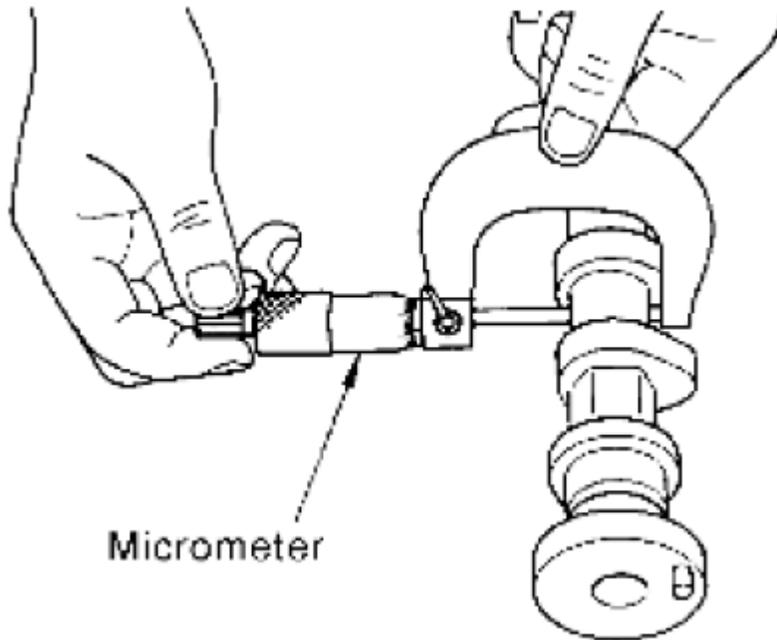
Measuring Outer Diameter Of Camshaft Journal Using Micrometer
